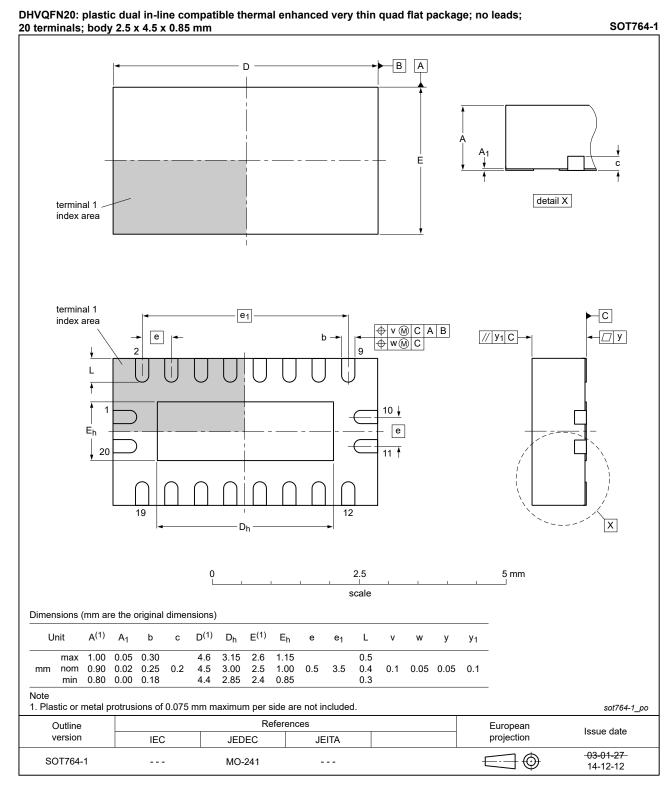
Package outline SOT764-1 (DHVQFN20)
